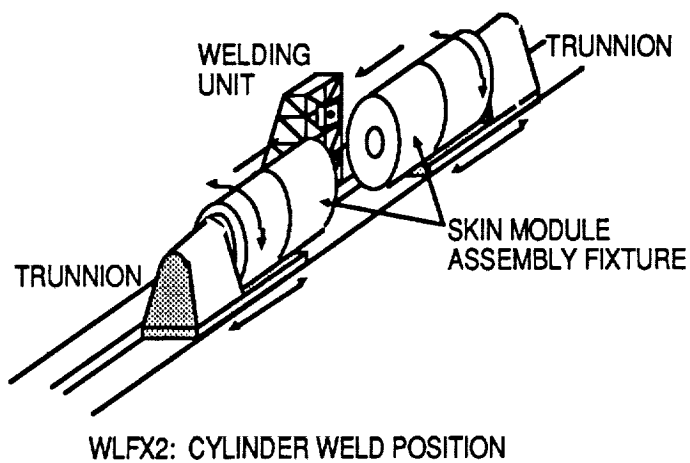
Adjustable trunnion mounted weld fixture concept.
